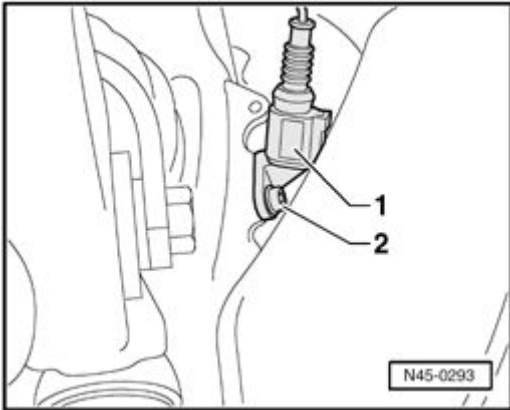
Identifying Speed Sensor, Speed Sensor Wiring Connector & Bolt
